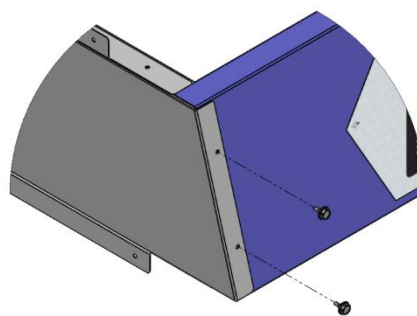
Secure rear panel to side panel with supplied No. 10 x 3/8" screws.
